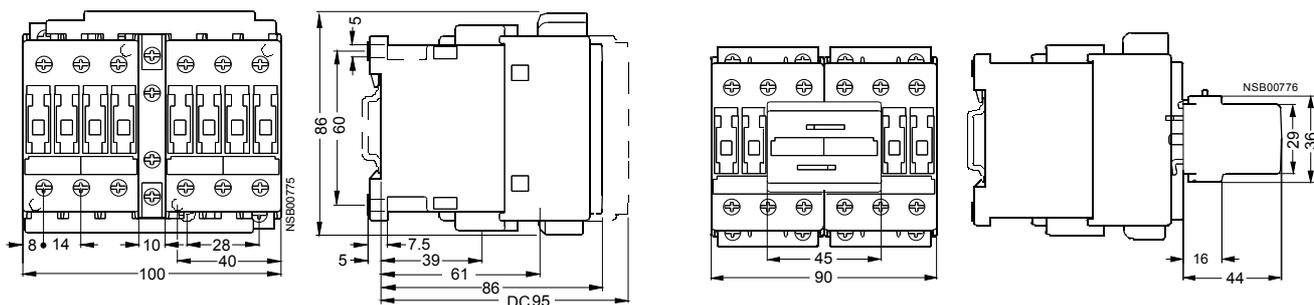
Reversing contactor combination with mechanical interlock 3RA19 24-2B, side
